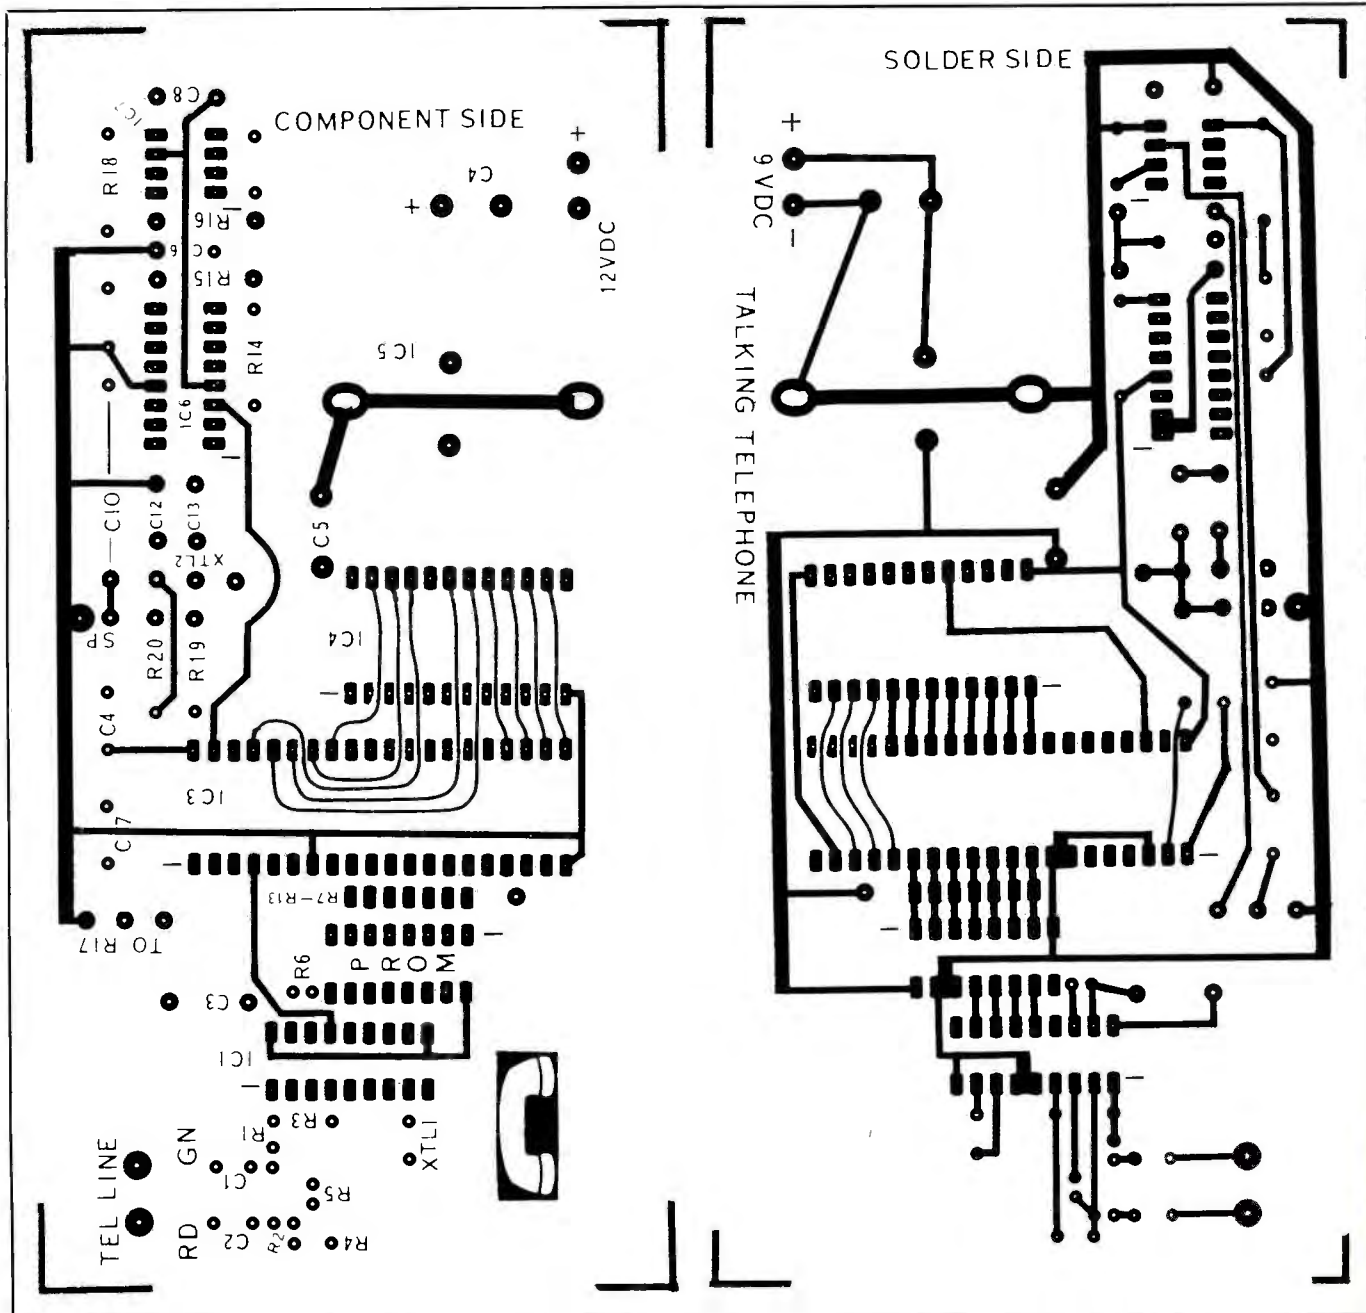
Actual-size etching-and-drilling guides for top (left) and bottom (right) of double-sided printed-circuit board required for wiring together the project.
